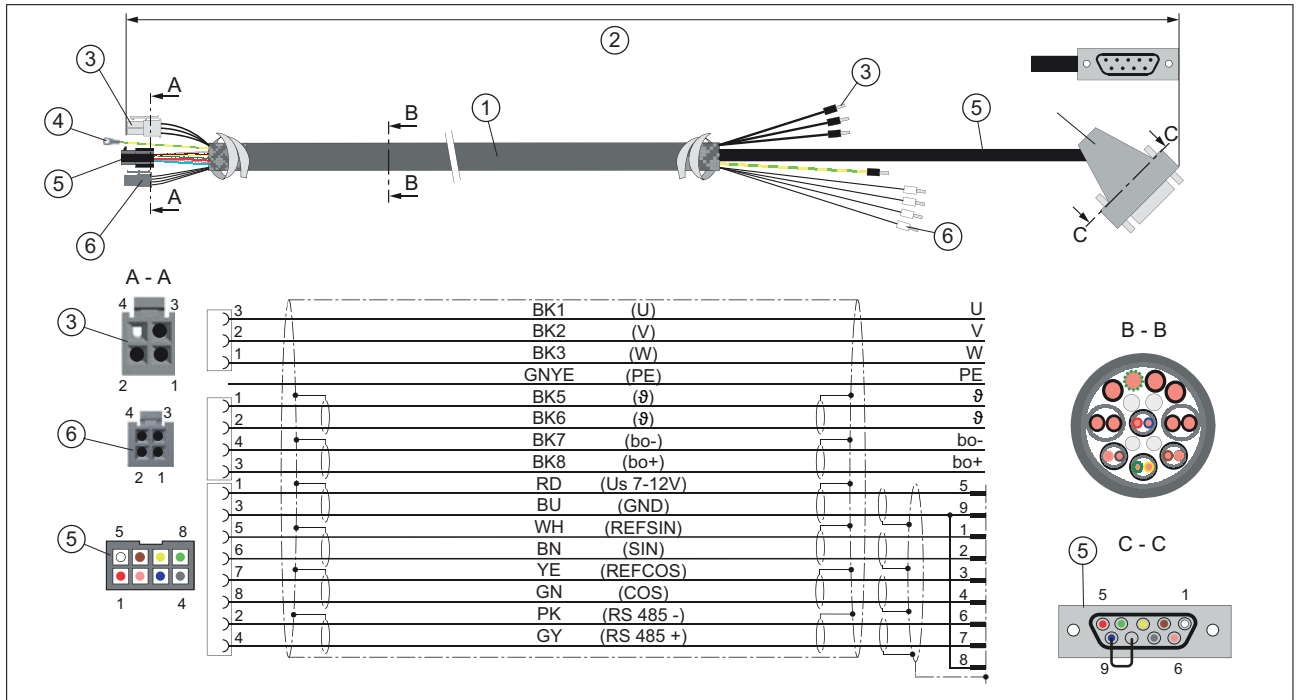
Motor encoder cable 1.5 mm² (PacDrive-M, MC-4)
